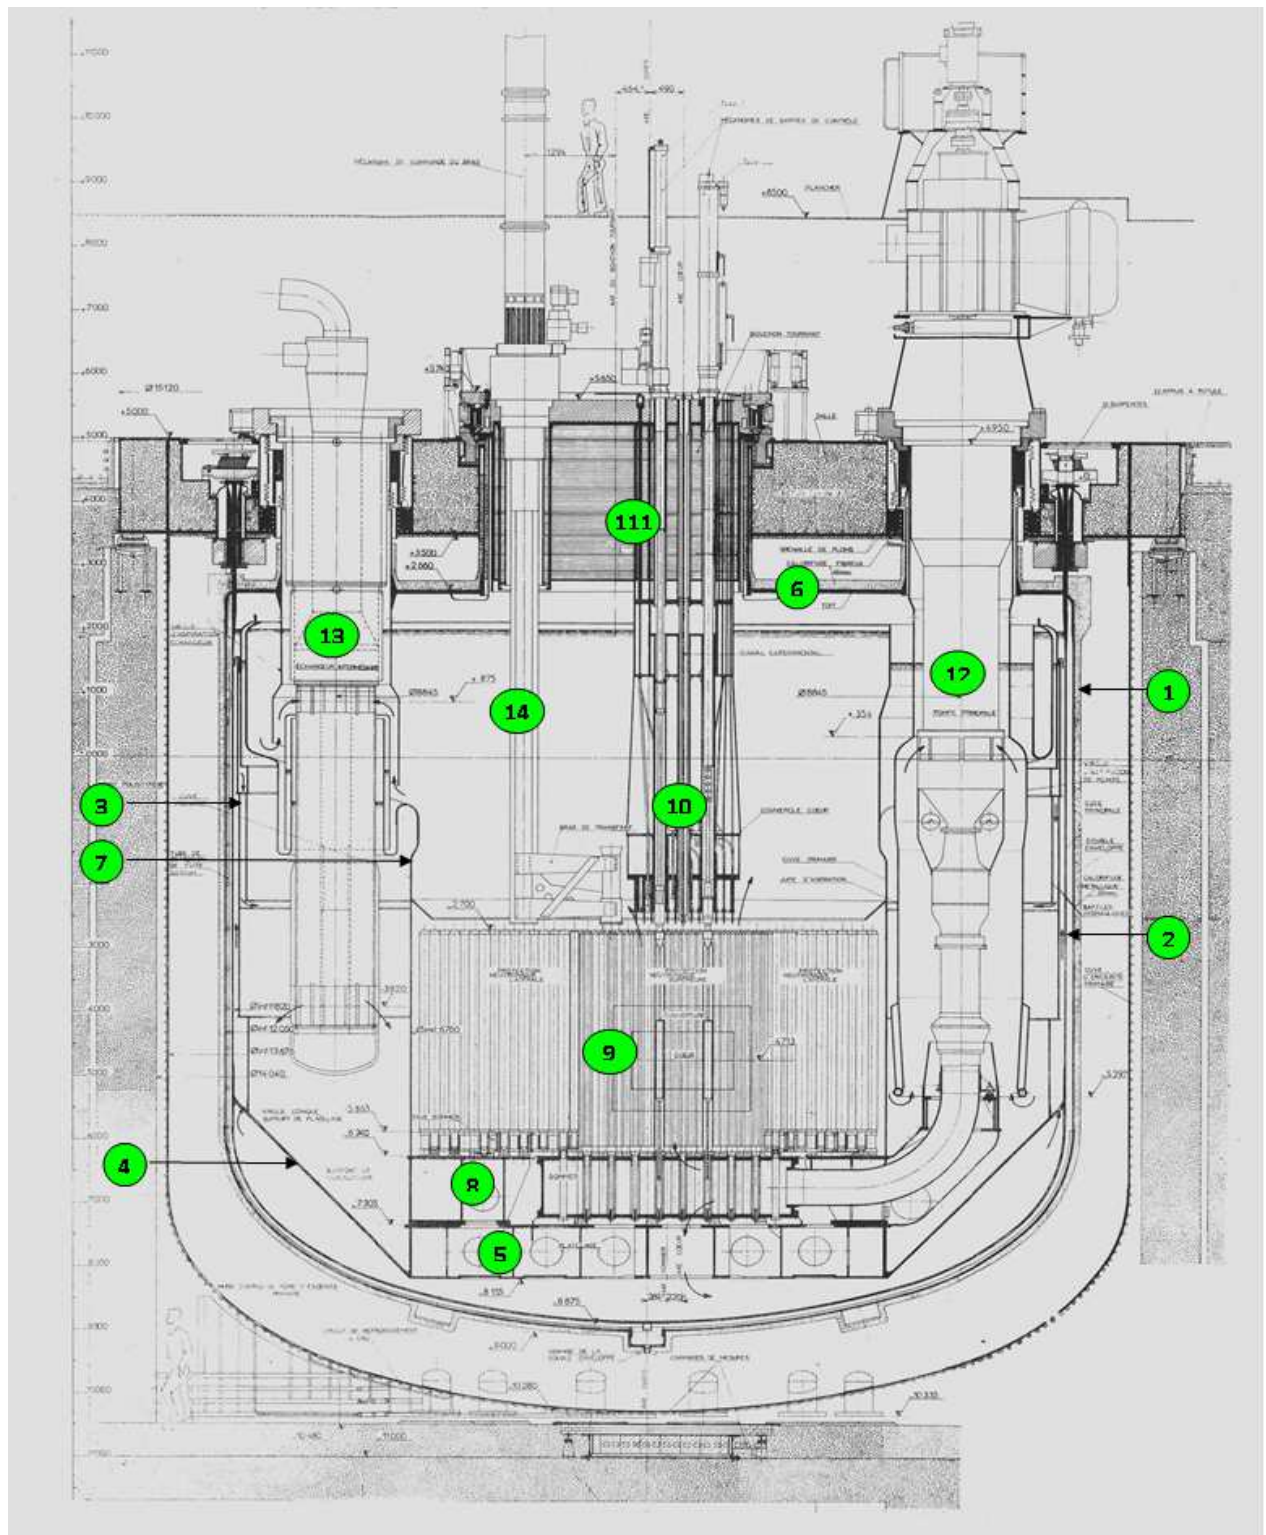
Phenix reactor - Reactor sectional drawing primary pump-IHX [1].
